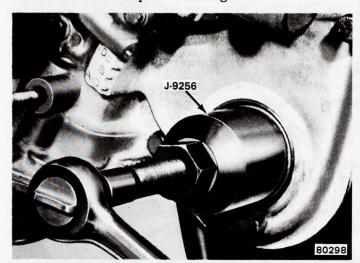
B-142 Removing Timing Case Cover Oil Seal
